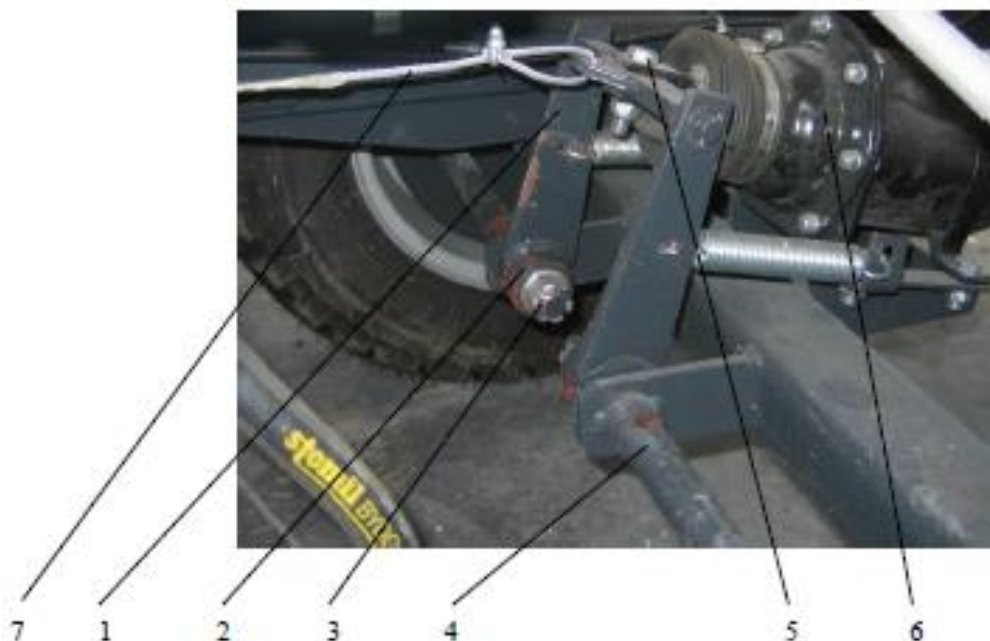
The components of the brake system: 1 – expander roller lever (arm), 2 – locating comb, 3 – adjusting screw for fixing the lever (arm) to the comb on the expander roller,
